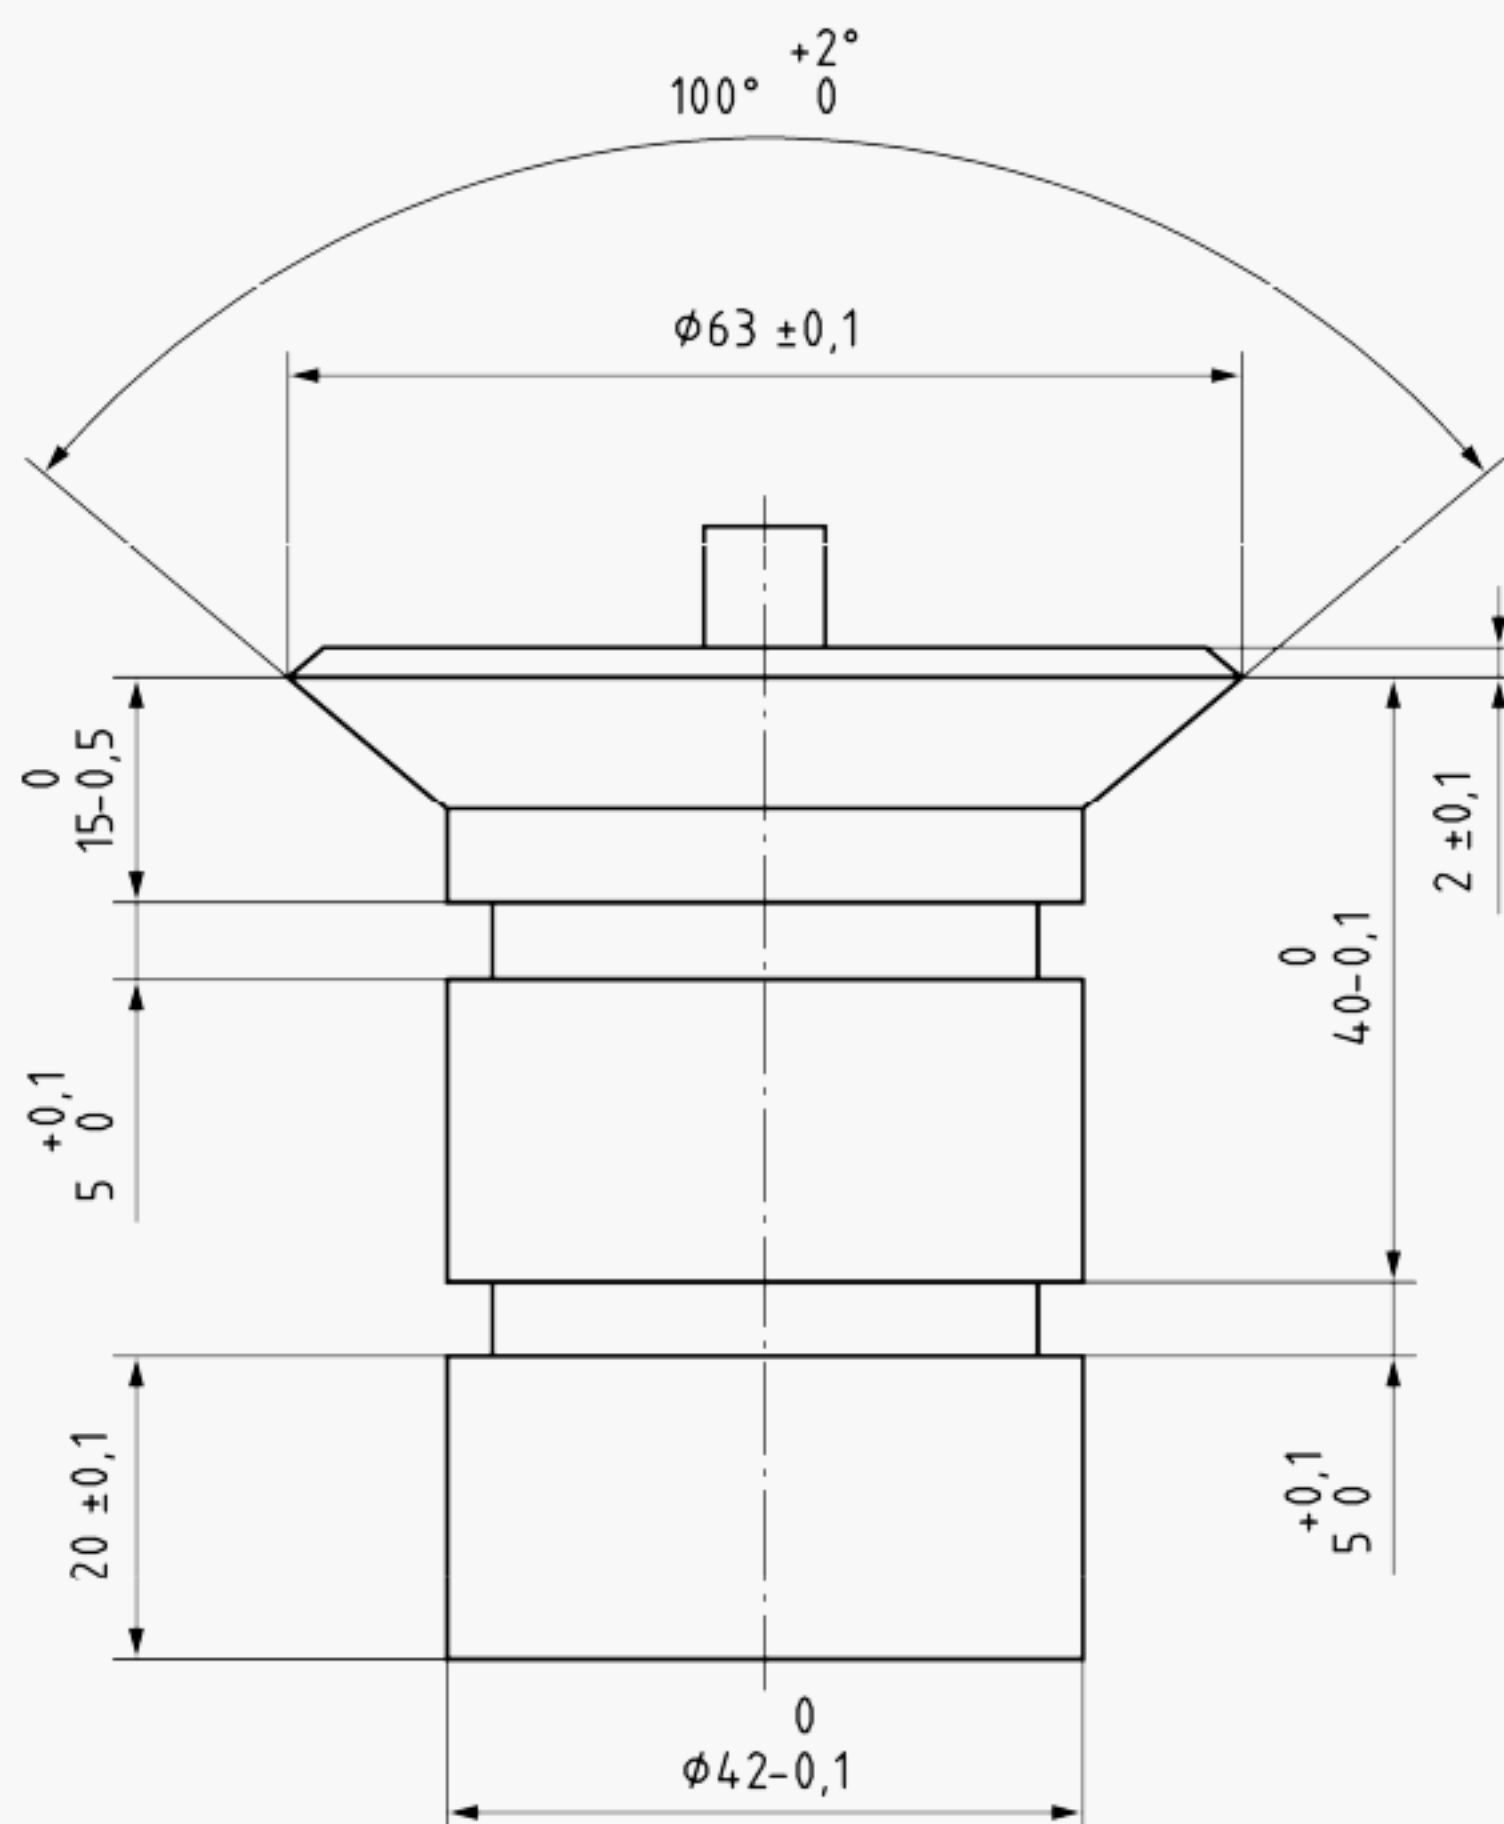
Example of a gauge to verify the connecting dimensions of waste outlet holes with or without integral overflow
